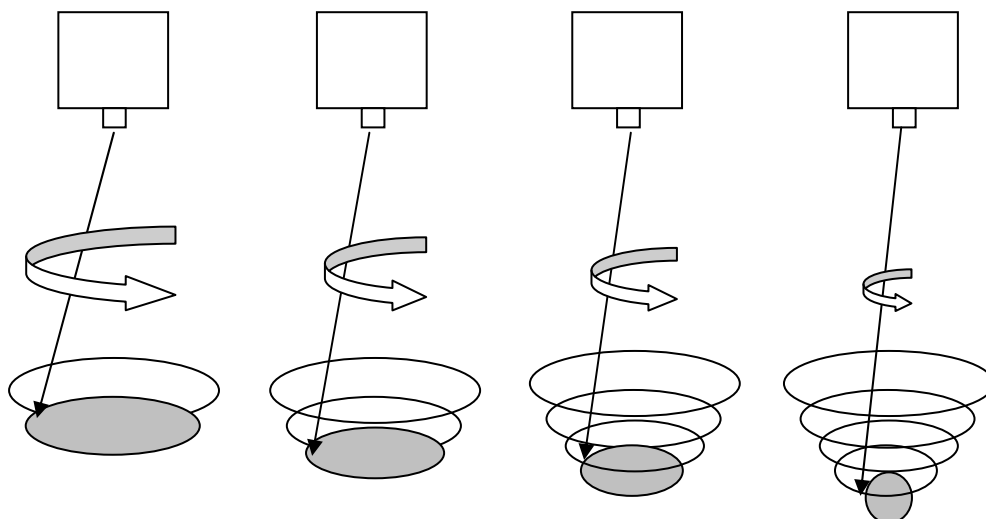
Laser Cutting Pattern Used to Cut Symbol Data Cells into Sand-Cast Mold
